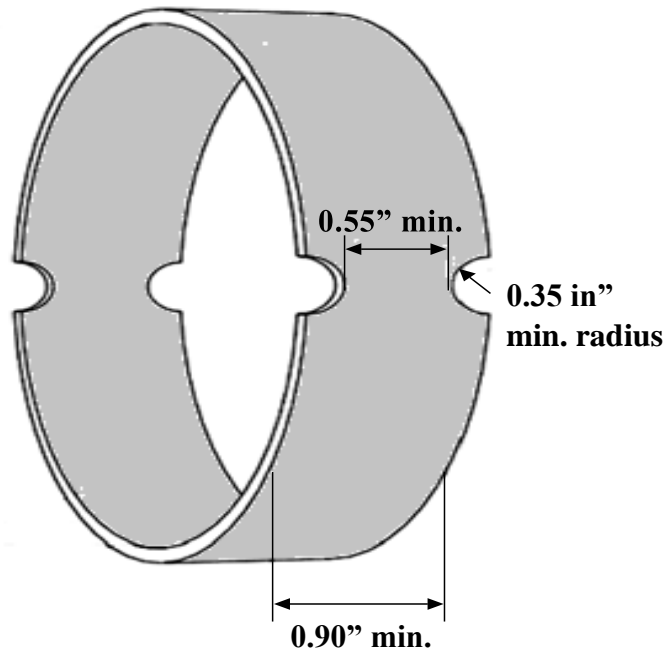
Dimensions of ring test samples [ASTM D2290-2003]
